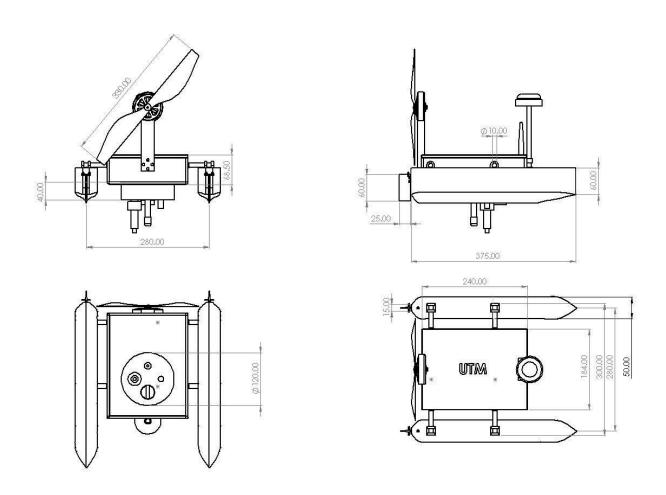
Catamaran Drawing (all dimensions in mm)
